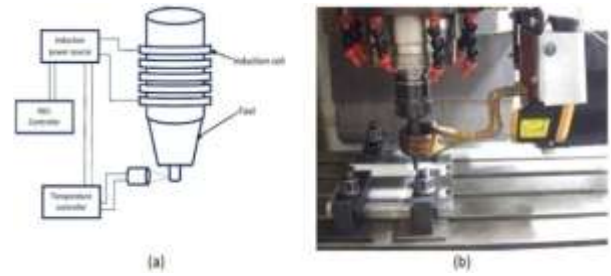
FSW tool with induction coil : a)Schematic, b)Set-up [39]
